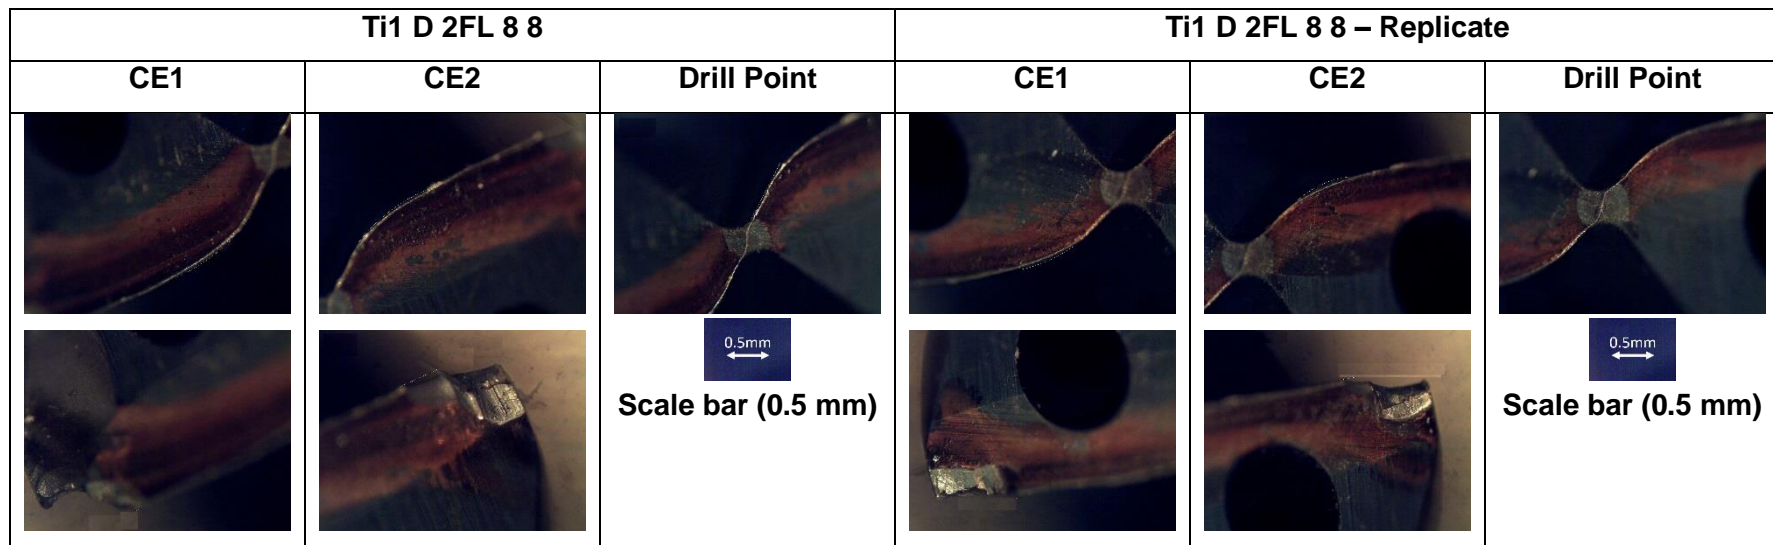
Extreme cutting tool wear at the corners and chisel edge flank wear at the drill point
